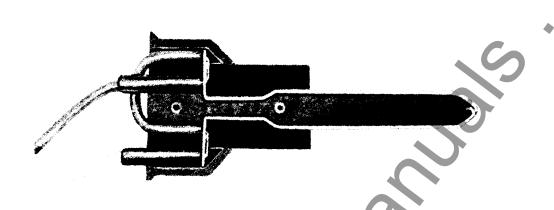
(8043329) Sectional View of 12XCA11A2 Test Probe
